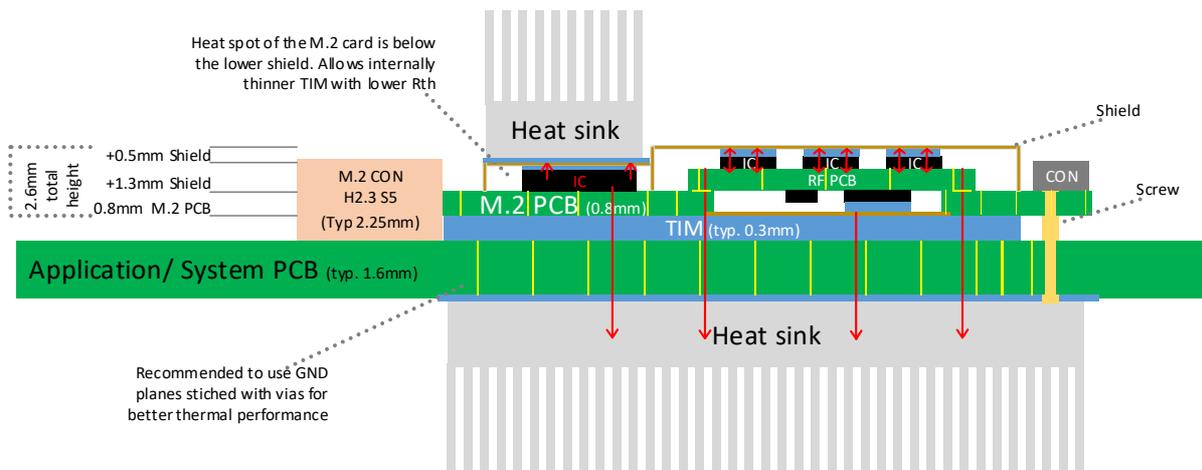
Option 2 - Heat sink only on heat spot of stepped shielding and bottom of application PCB
